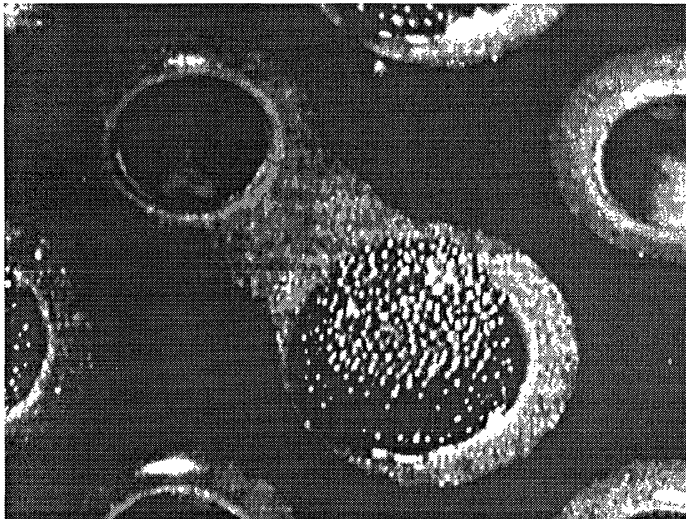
Micrograph of an PBGA Test Board Pad with Eight Milis of Screenprinted Solder Paste (Magnification of Approximately 40X, 45°)
